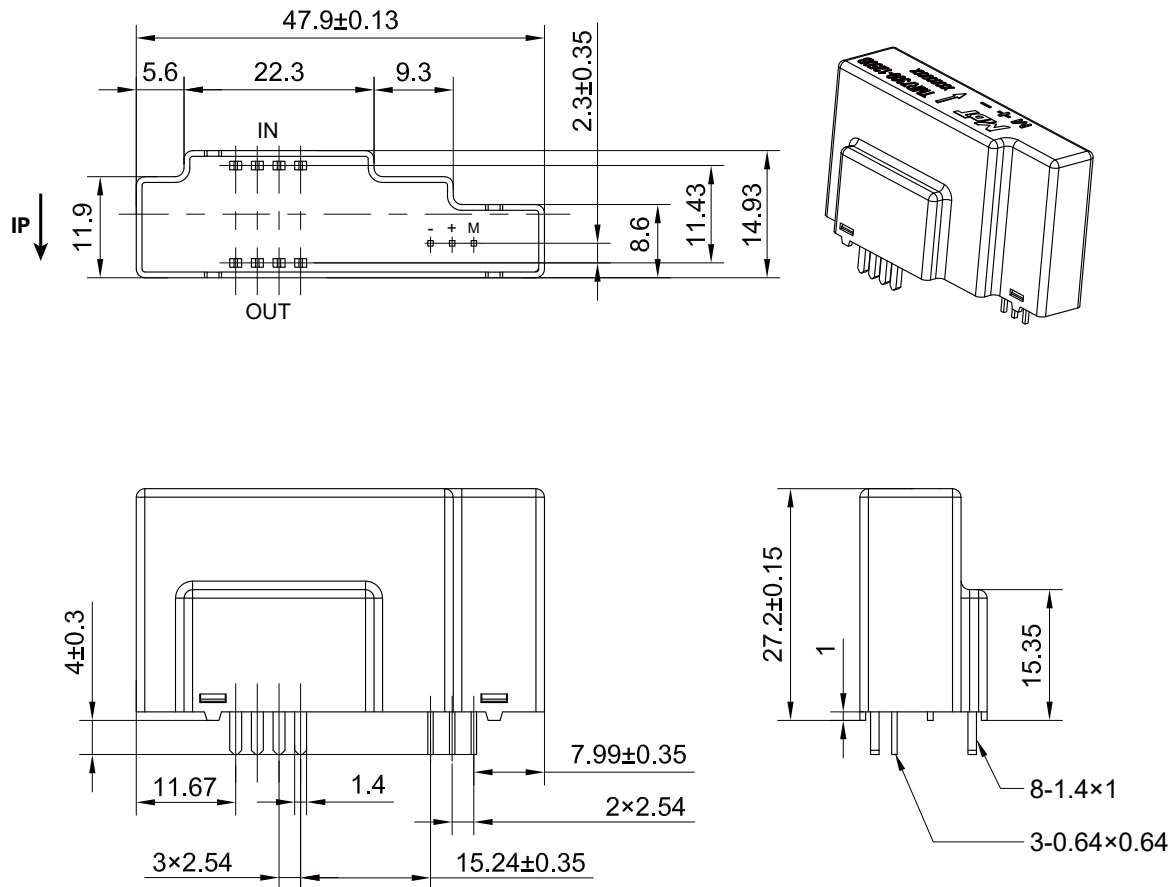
TMR7309-B Dimension (unit: mm, tolerances for unmarked scales ± 1 mm)
